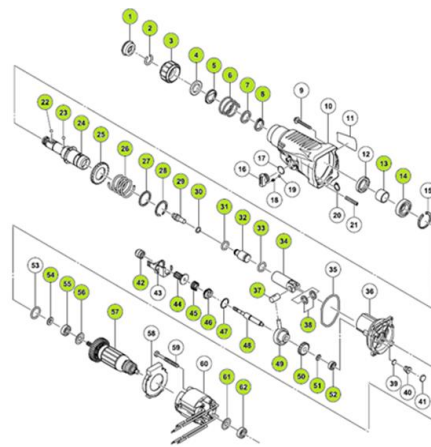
Assembly drawing Hitachi DH 22 PH [47]
